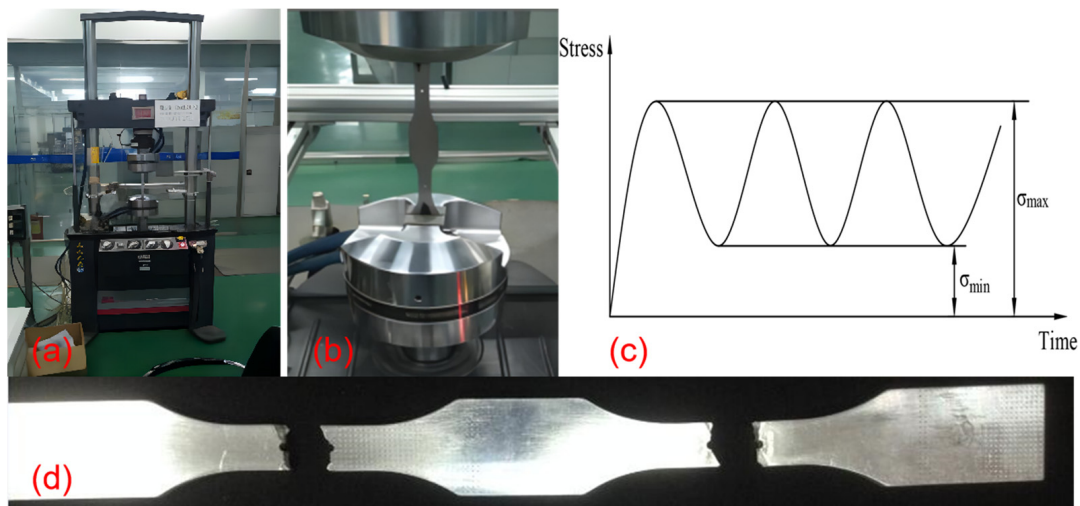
(a) Fatigue testing machine; (b) sample clamping diagram; (c) load curve; and (d) a fractured specimen.
